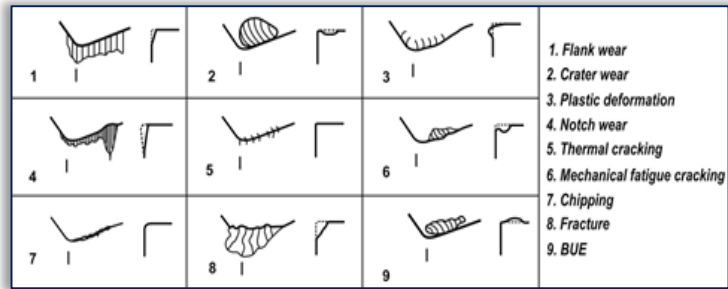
Types wear on cutting tools (adapted from Sandvik)
